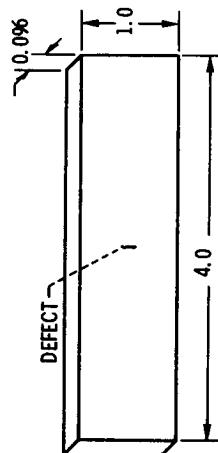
Schematic of specimen with defects (T-75/PR288 [45, -45, 90, 0, 0]_s, all dimensions are in inches).
